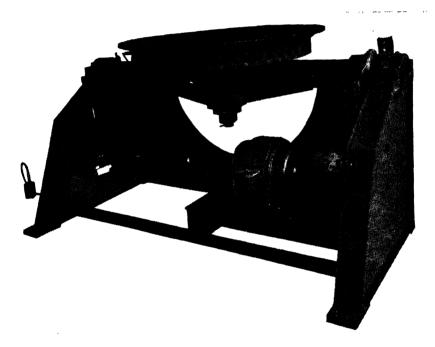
A welding turntable (Courtesy of: Harnischfeger Corporation)
